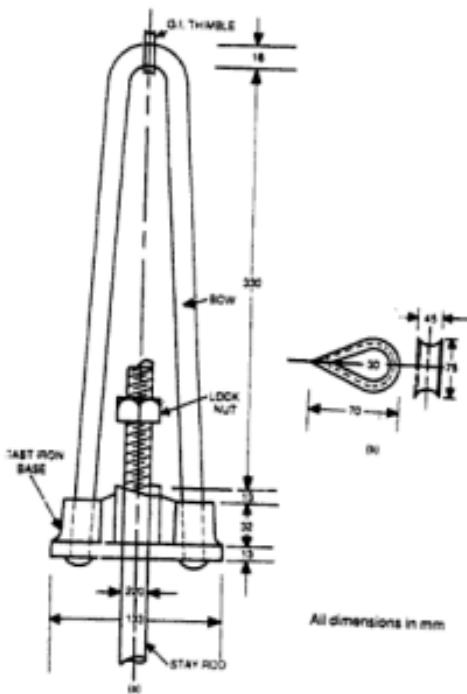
(a) Guy bow assembly; (b) GI thimble
